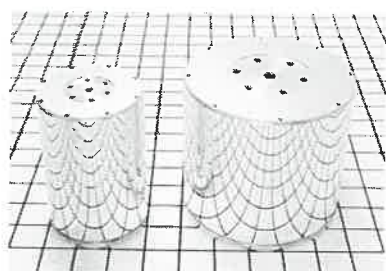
Photograph of diamond turned double aspherical dies of 400 mm mirror length, and 300 mm diameter on the left and 500 mm diameter on the right.
